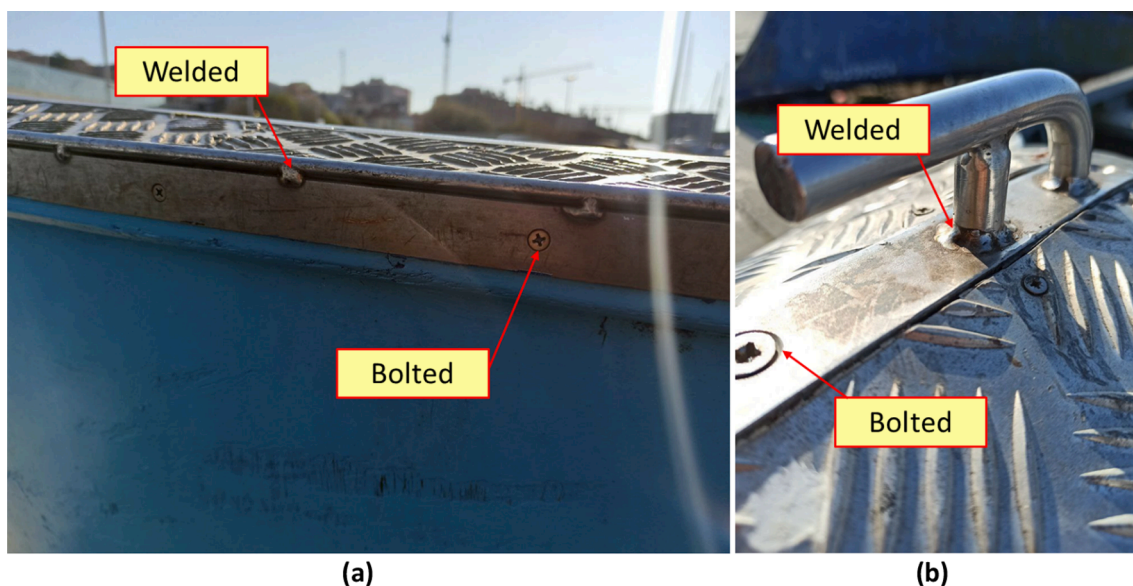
Application of the welded and bolted joining methods in a) joining of steel gunwale to the wooden hull and b) steel cleat to steel gunwale.
